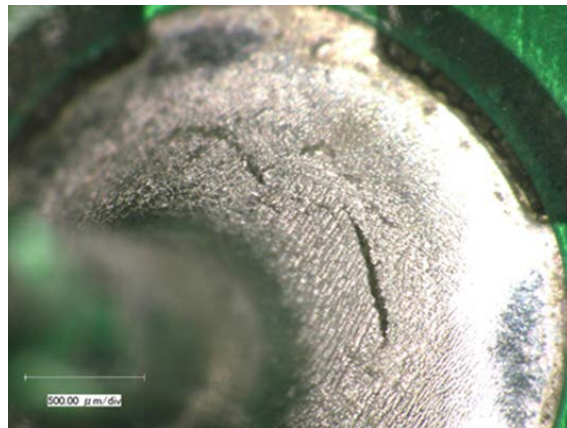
Shrinkage void in SAC305 that has intersected the surface of the solder fillet to form a contraction cavity
